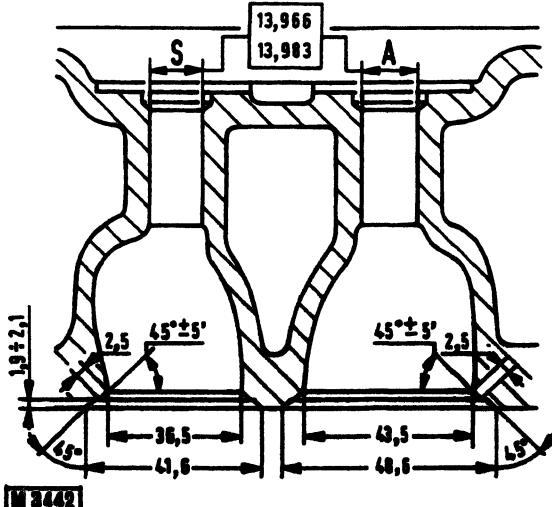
Valve seat and valve guide seat dimensions (mm)
